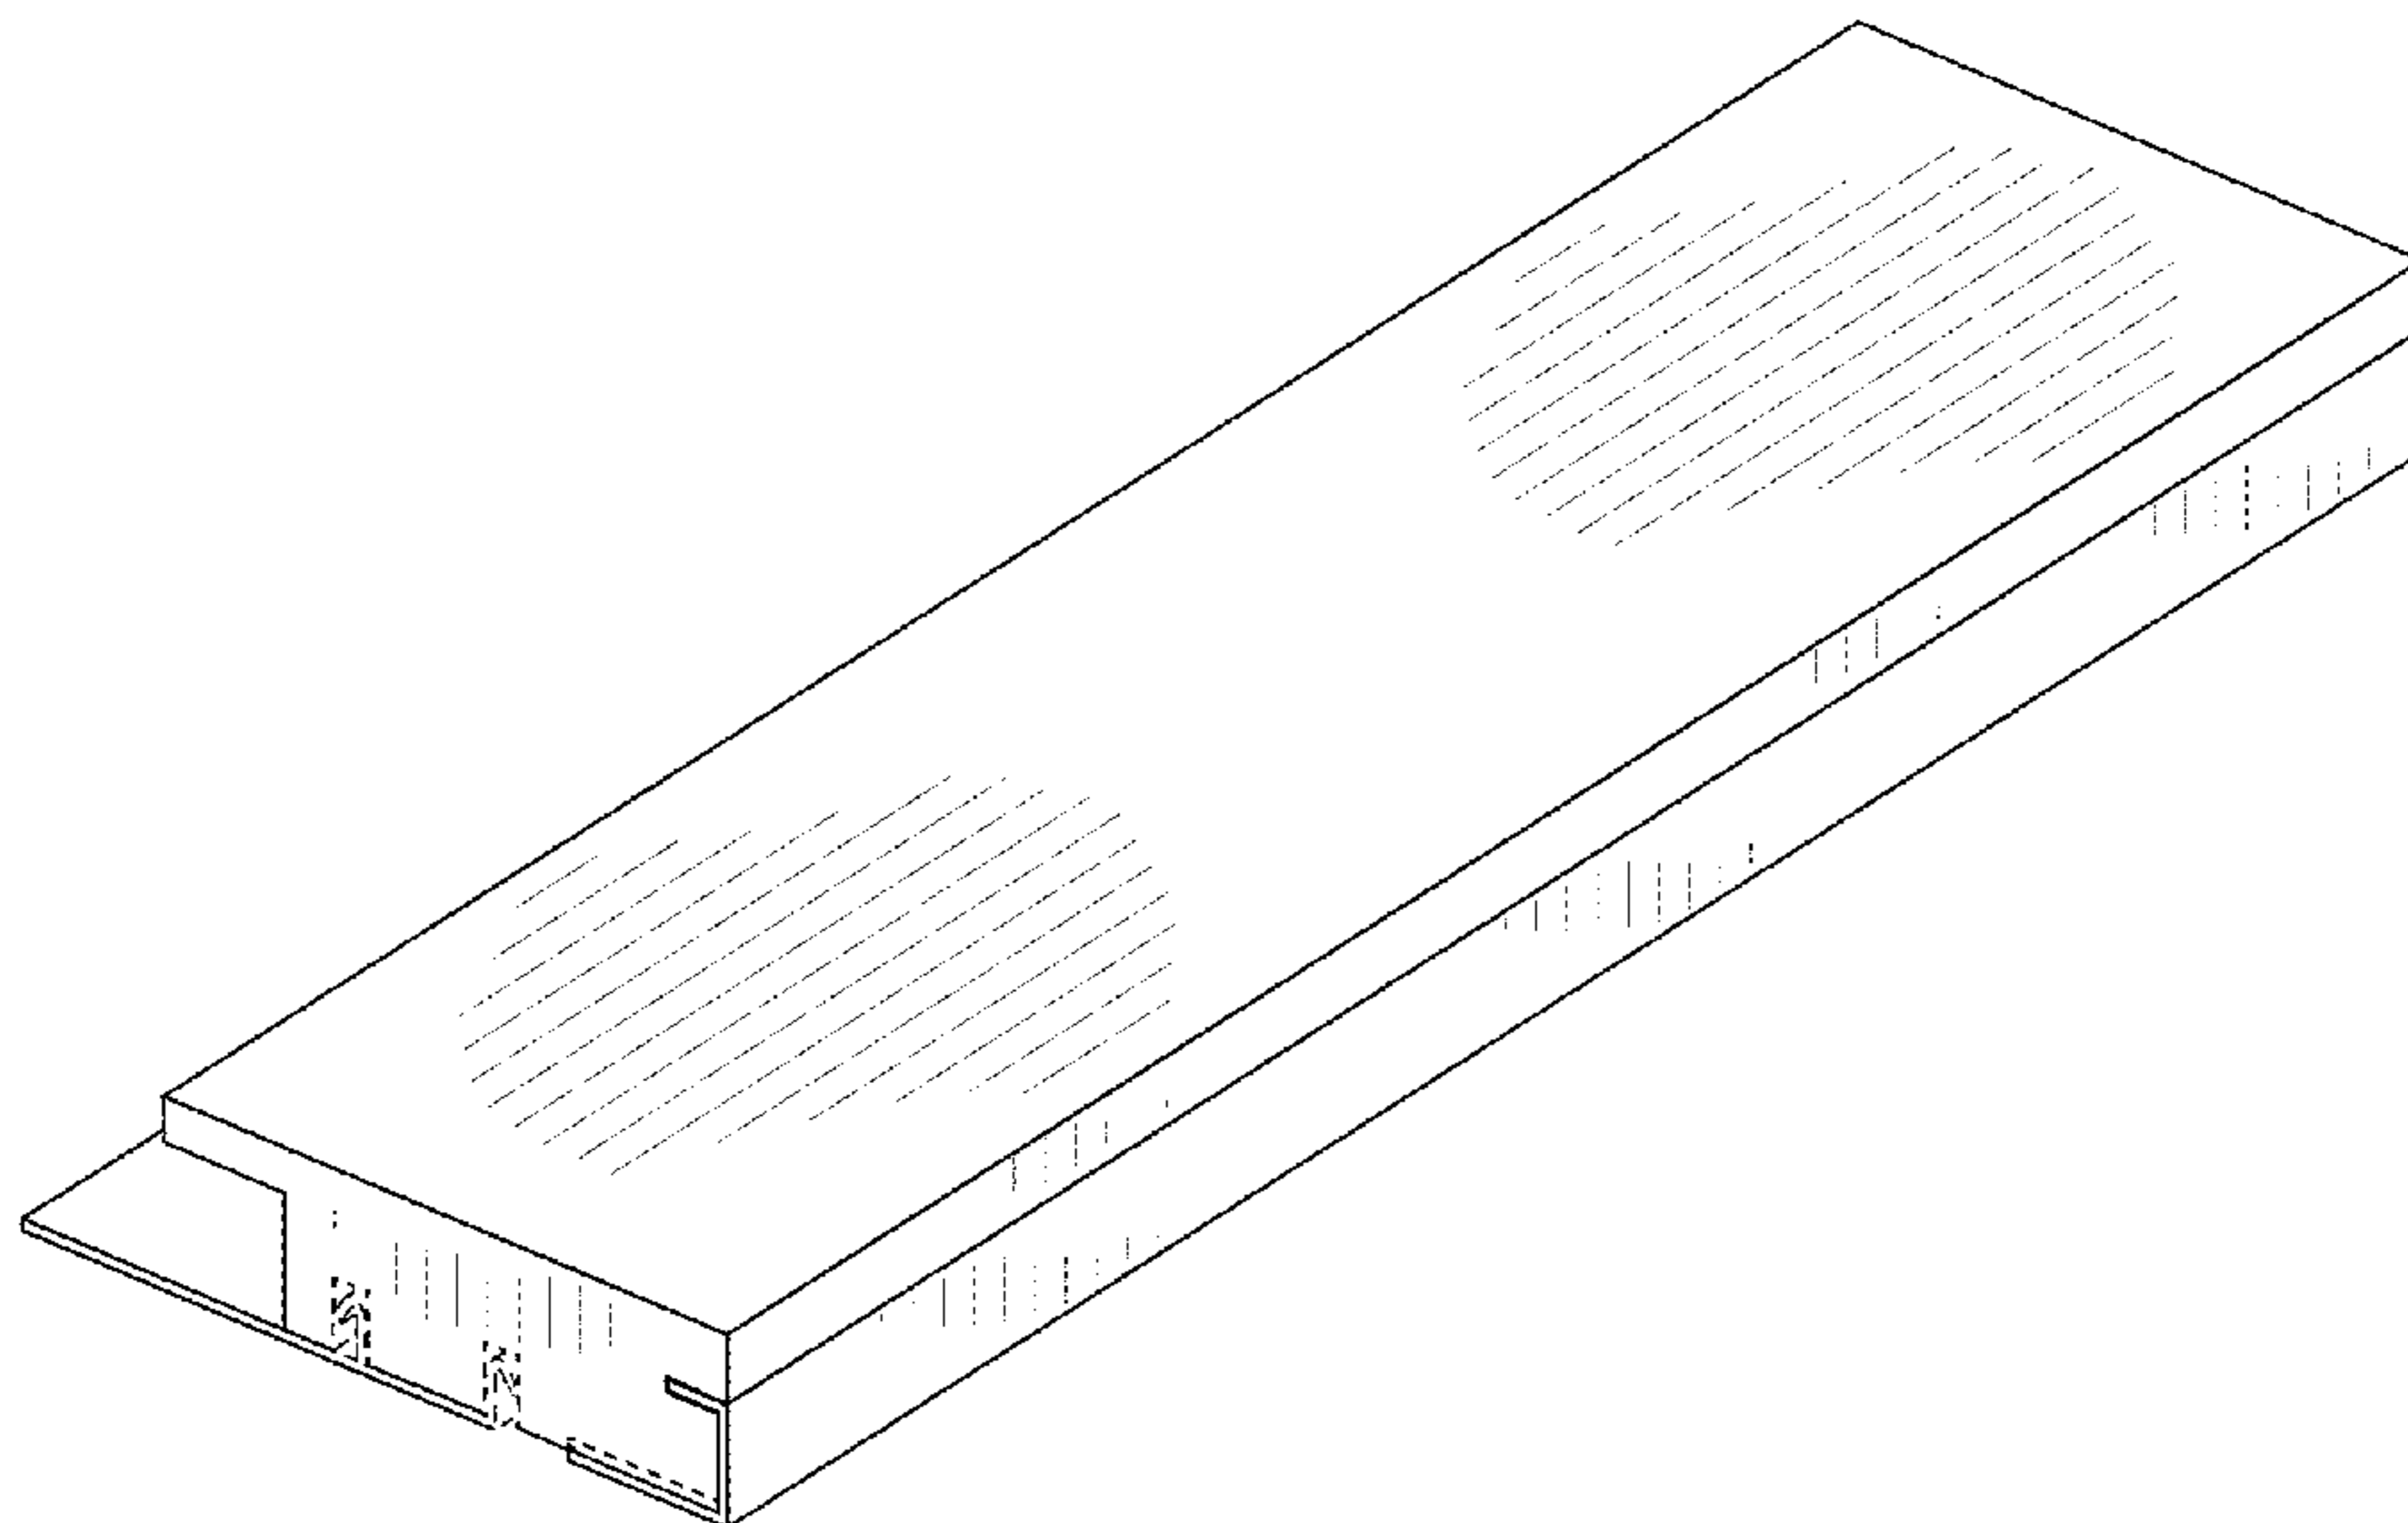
is a top isometric view of a trim assembly; the broken lines depicting portions of the trim assembly that form no part of the claim.
